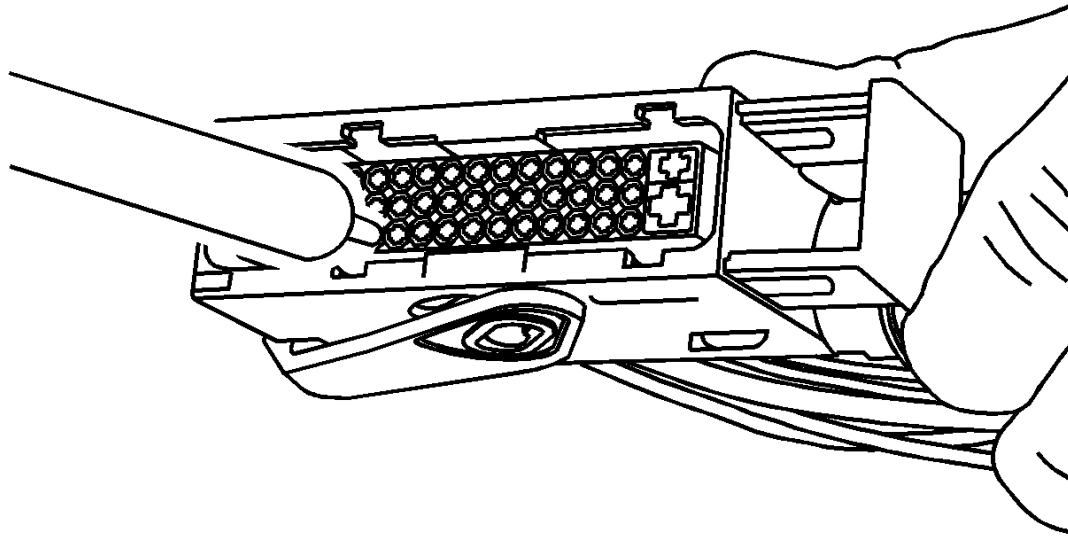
View Of Wire Being Pulled Out Of Back Of Connector While Holding Removal Tool In Place
